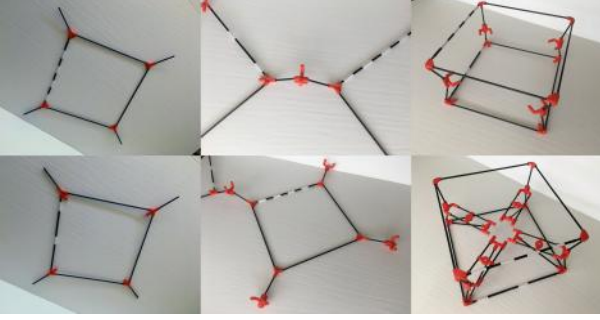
The frame uses flexible 3D printed parts (shown above in red) that are printed flat and fold as you assemble the drone. The steps above illustrate how we assemble the outer frame mixing the flexible TPU parts with carbon fiber rods (left and center), finally folding and connecting top and bottom together (right). After the last step (right, bottom), it is necessary to add the rigid central 3D printed parts to have a full, ready-to-fly frame.
